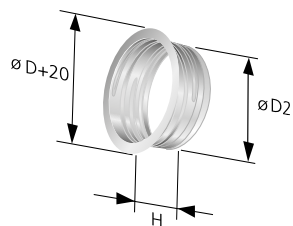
Mounting frame EXCT 3. Conical mounting frame for connecting directly to a duct section with nipple connector, for example an elbow.
